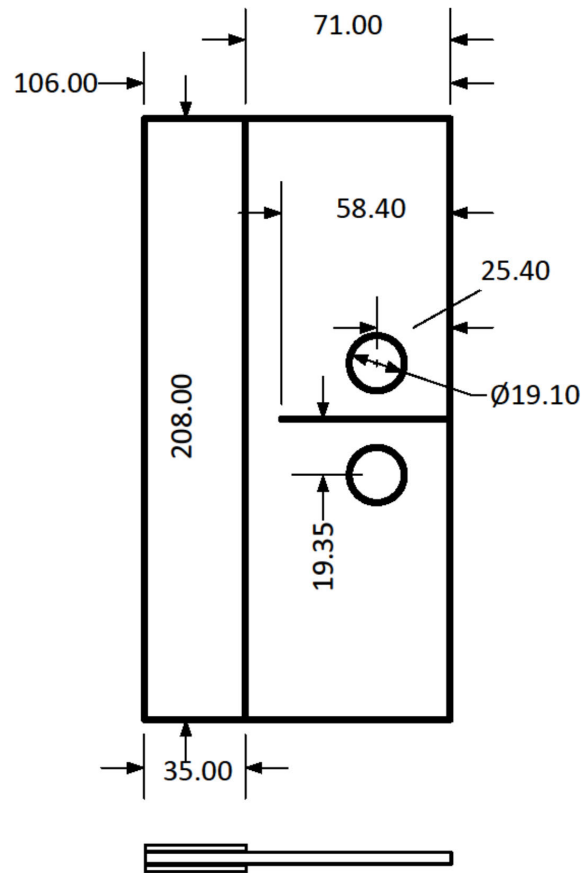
Dimensions of the stiffened OCT specimens, all dimensions in mm.
